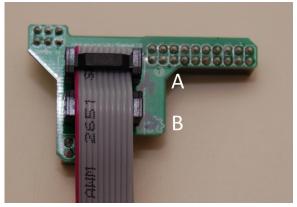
B: Red or Blue Display PCB cabling.
